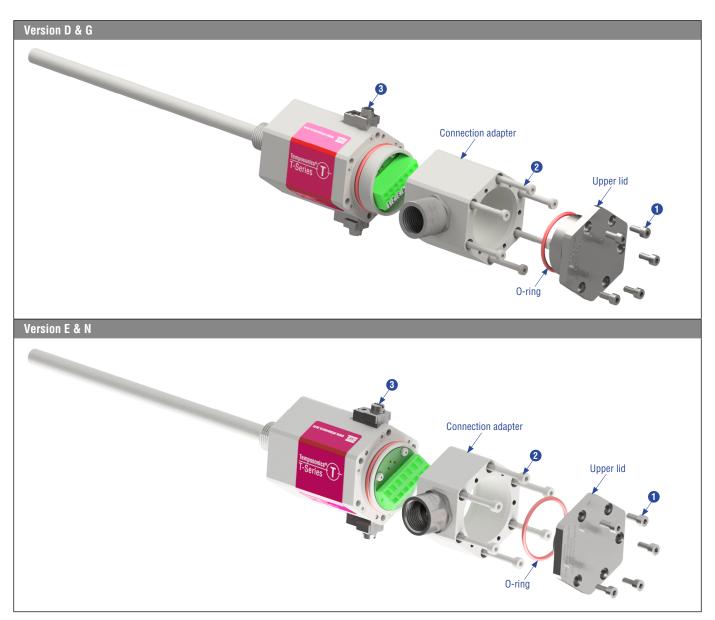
Temposonics $^{\otimes}$ TH exploded view drawing
